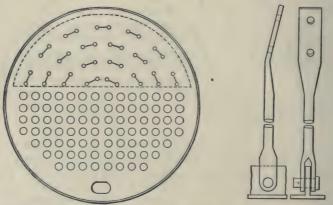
ARRANGEMENT OF STAYS AND TUBES.
